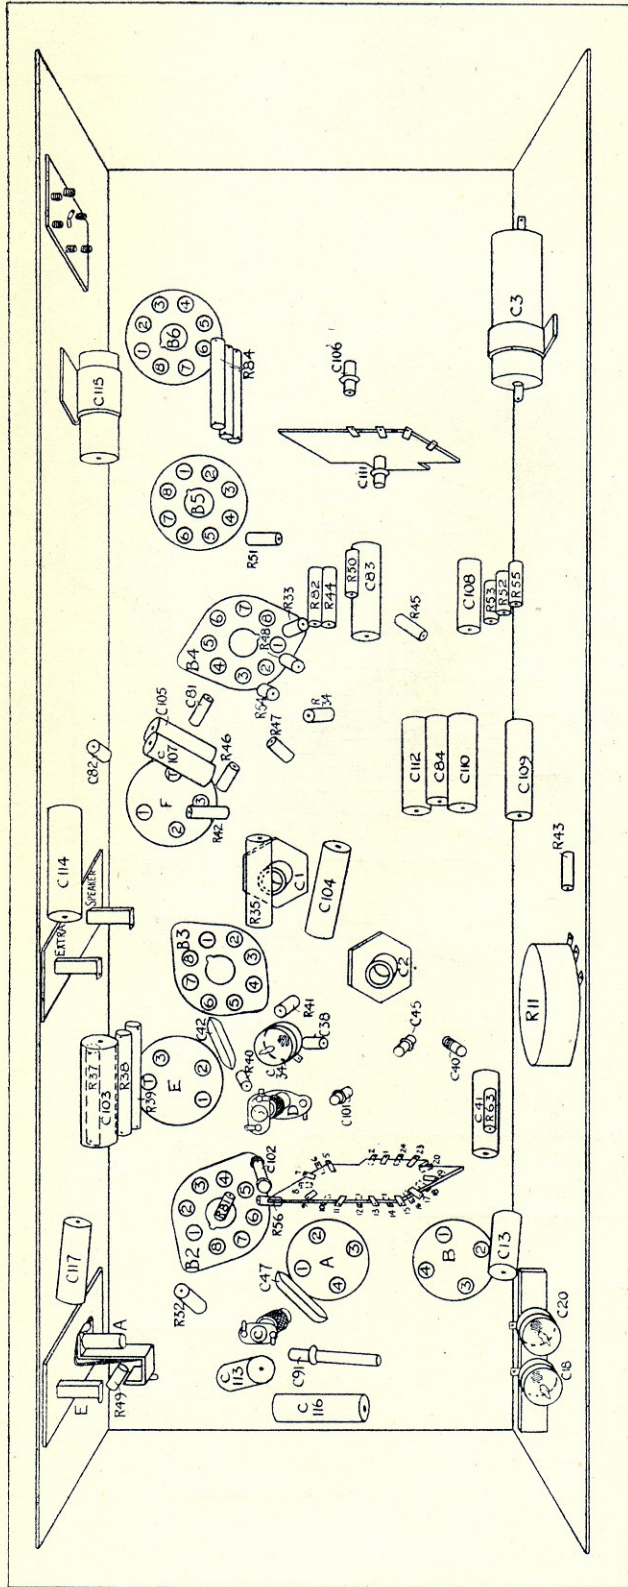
VIEW OF COMPONENTS. UNDERSIDE OF CHASSIS.
